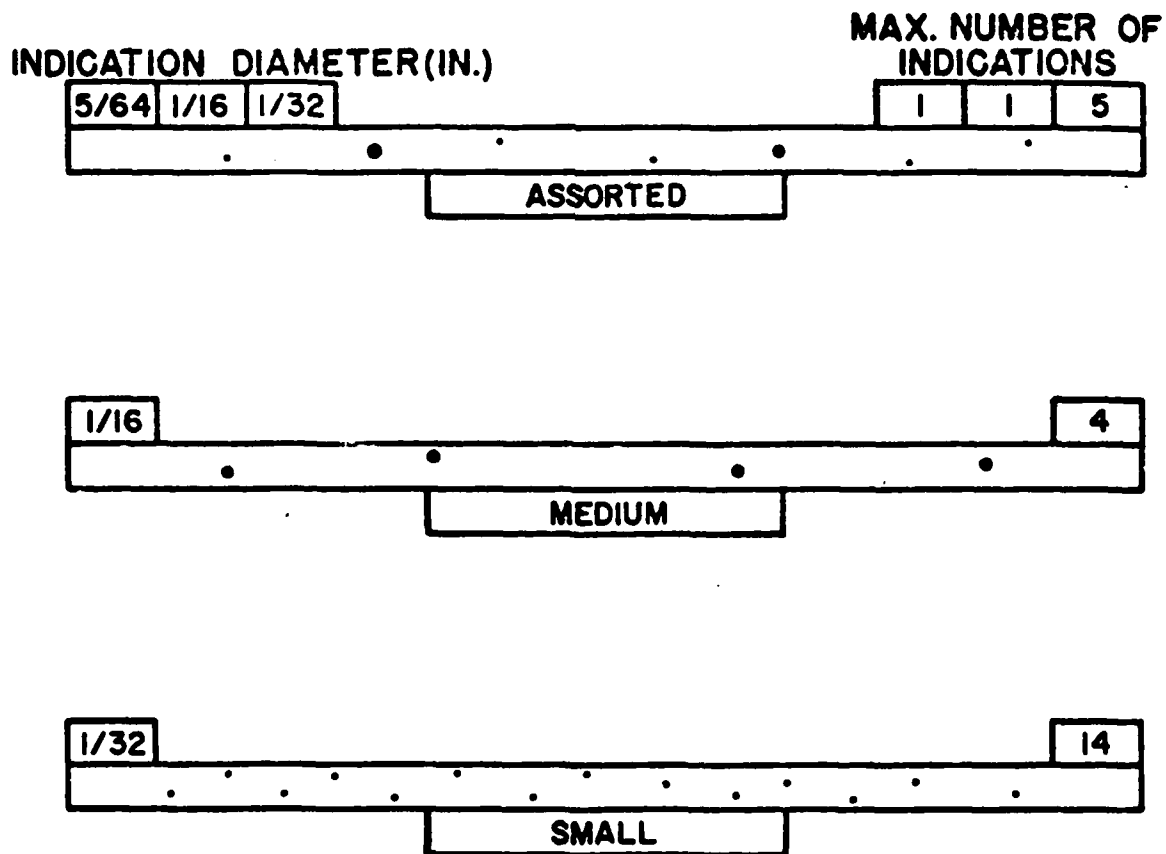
Class 3 Weld Surface Inspection Standards for Scattered Rounded or Non-Linear Indications (Sheet 1 of 6).
